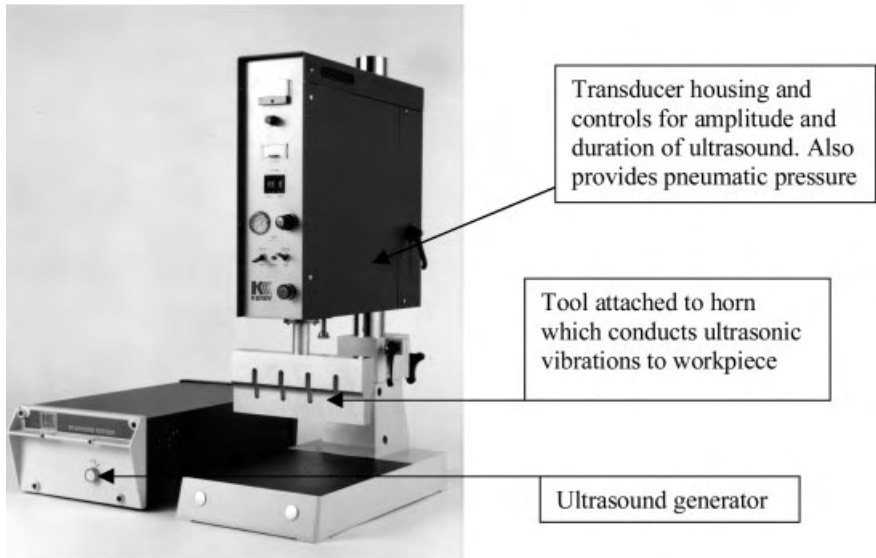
Ultrasonic plastic welding machine (photo courtesy of Kerry Ultrasonics, UK).
